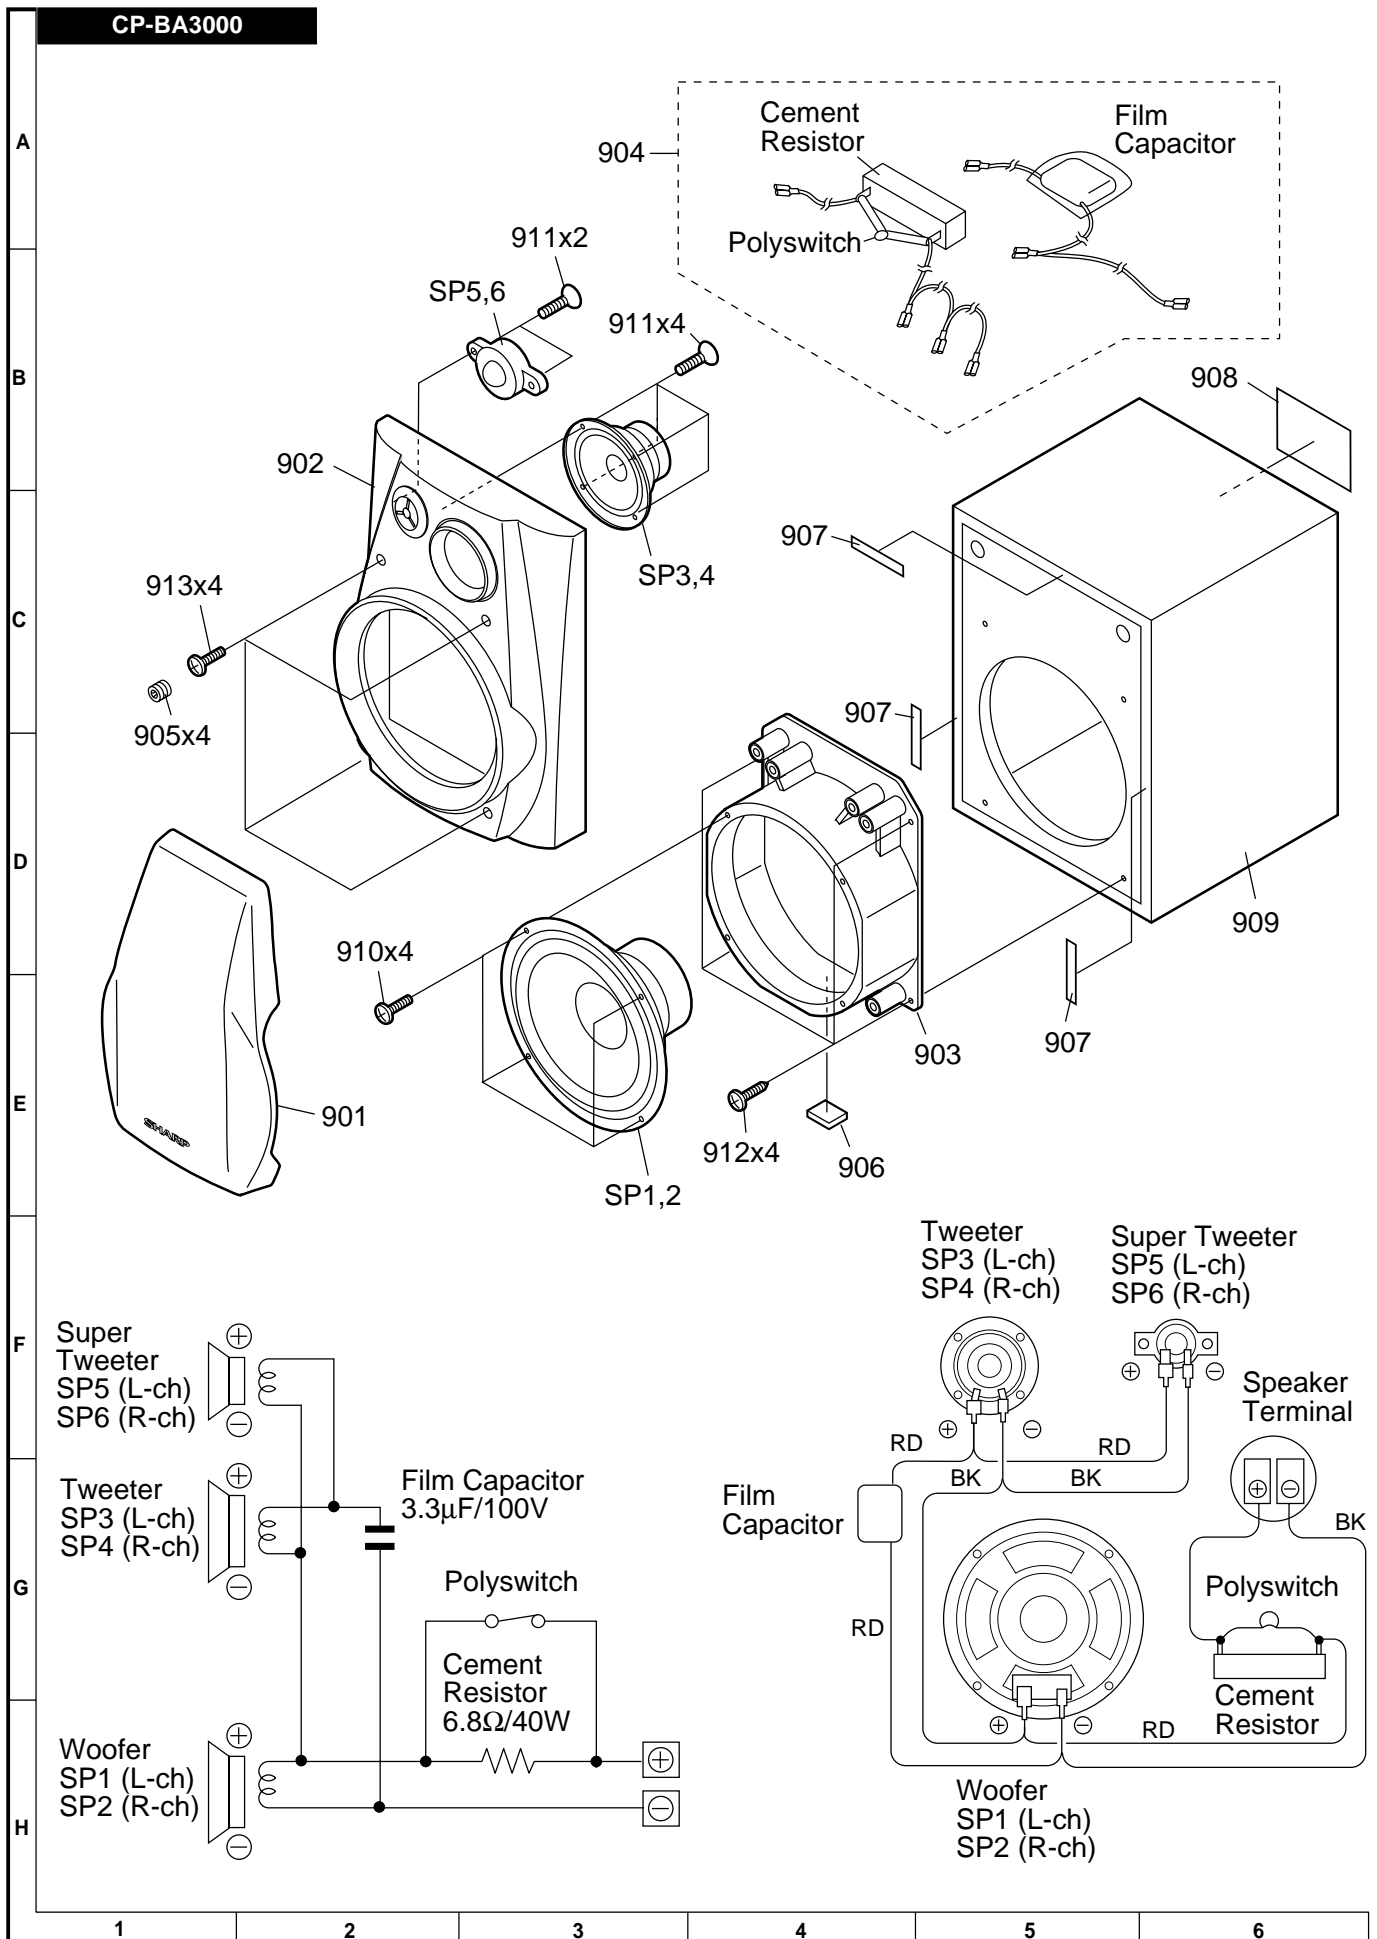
SPEAKER EXPLODED VIEW (1/2)
